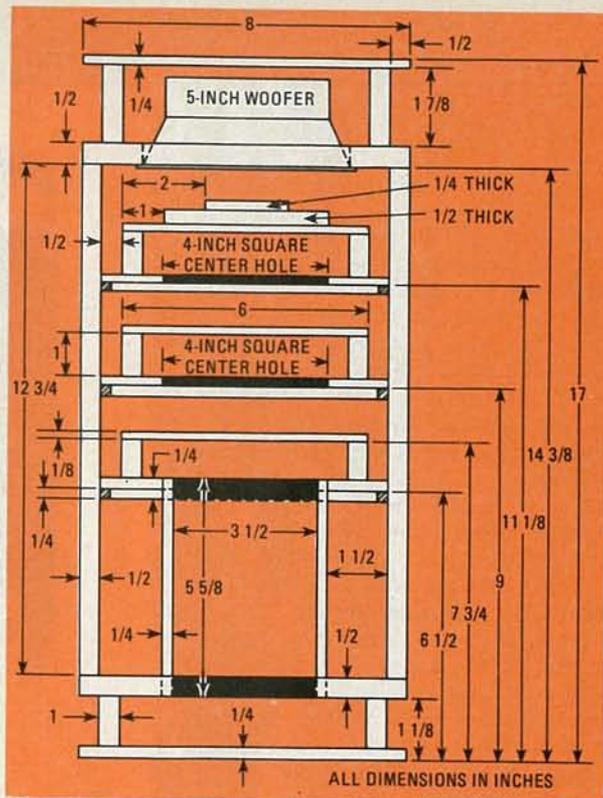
CRITICAL DIMENSIONS for mini-SAFE enclosure. If woofer is deeper than one shown, top supports may be lengthened.
